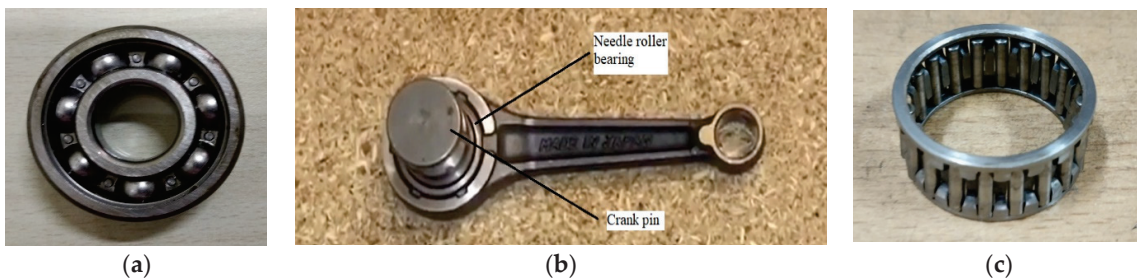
The construction of connecting rod: (a) ball bearing, (b) needle roller bearing between crank pin and connecting rod, and (c) ball bearing.
